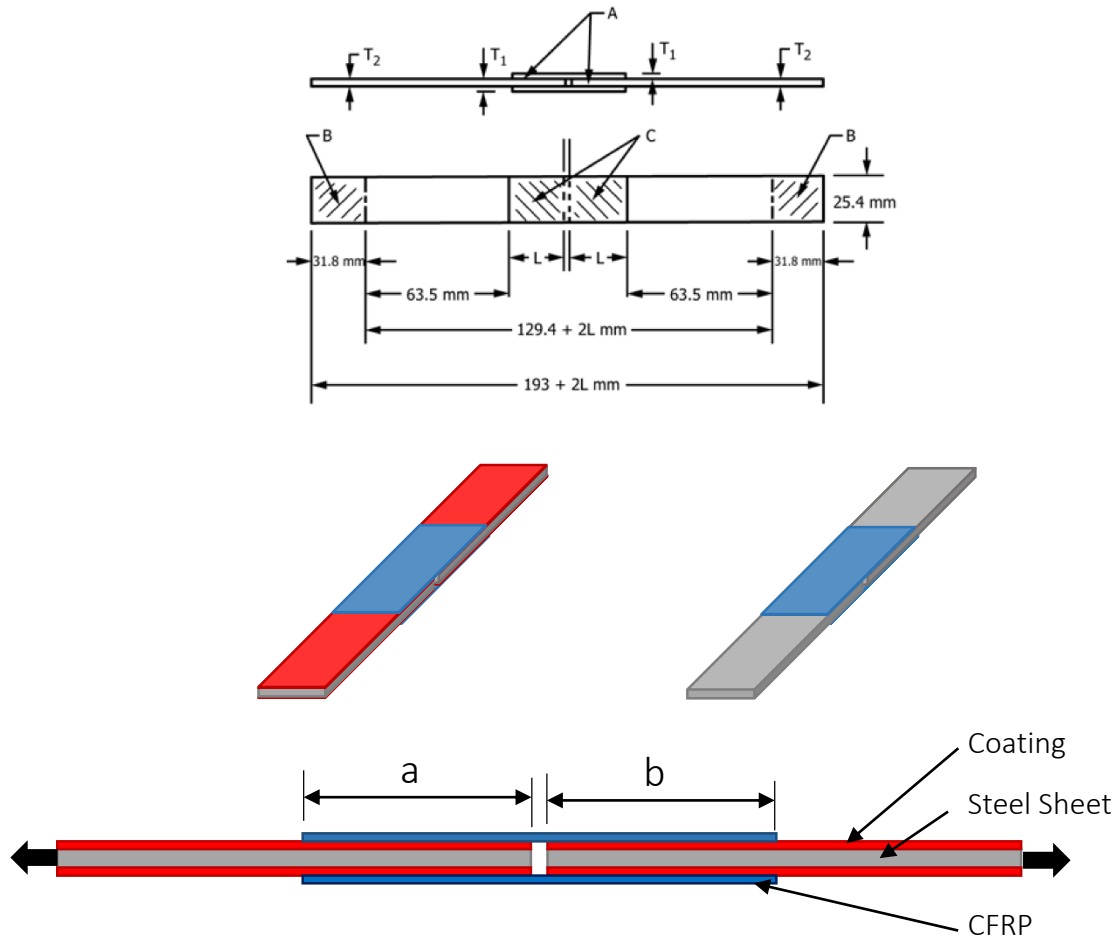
ASTM original type-B specimen(top), SETUP2 CFRP-STEEL lap shear test. coated and uncoated samples and Specimen details (bottom).
